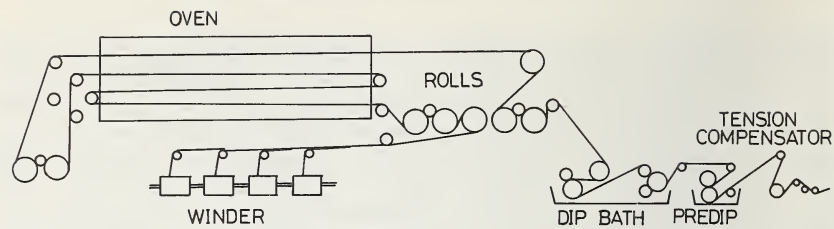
Schematic drawing of Kidde cord type heat set equipment.
